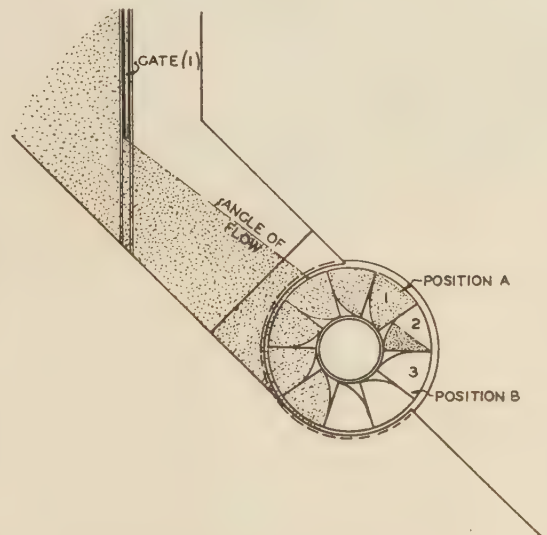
STAR-TYPE FEEDER, ELEVATION SECTION
